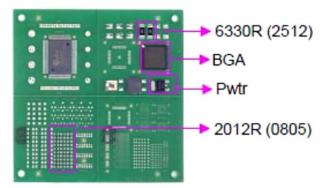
Company test vehicle used for additional testing on Paste Product C.
